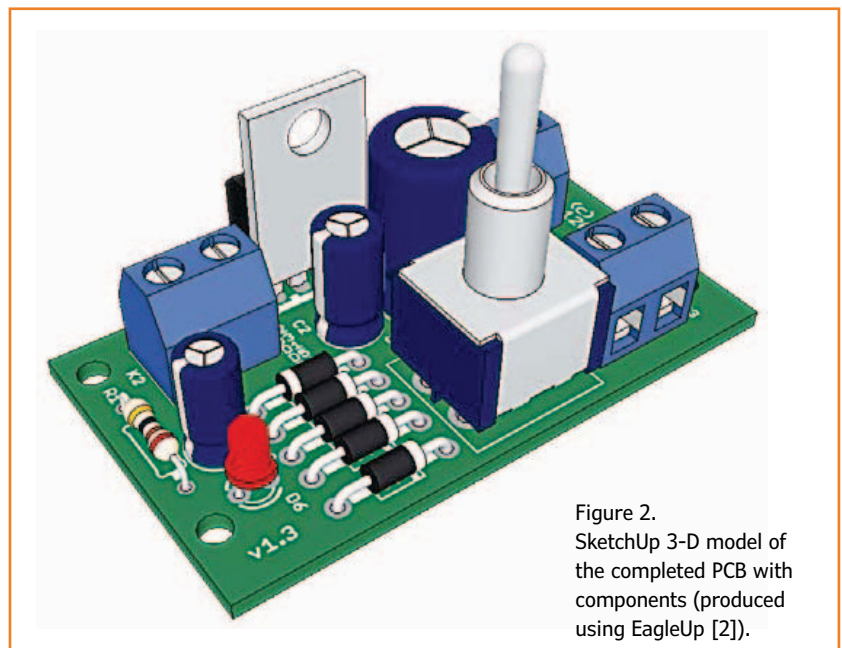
SketchUp 3-D model of the completed PCB with components (produced using EagleUp [2]).
